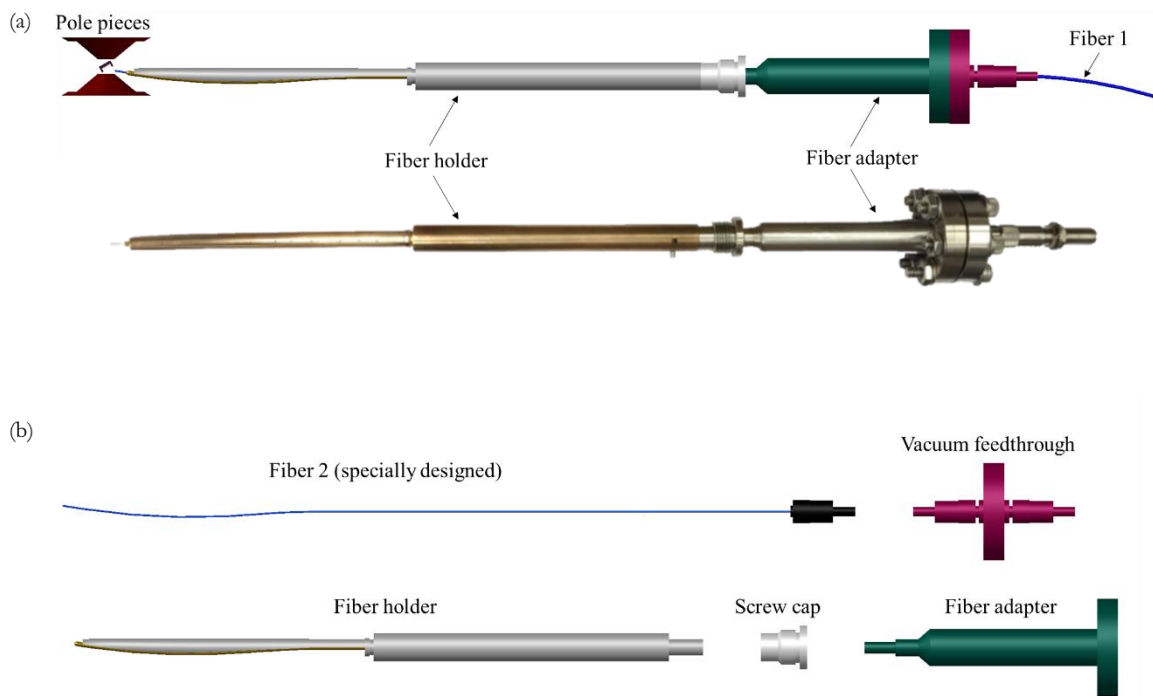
(a) A design drawing of the assembled device is compared with a picture of the fabricated device. (b) An exploded view drawing of the major components of this device.
